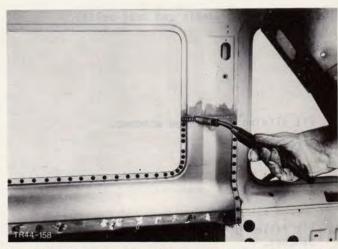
Weld inside window panel at connection to B pillar.
